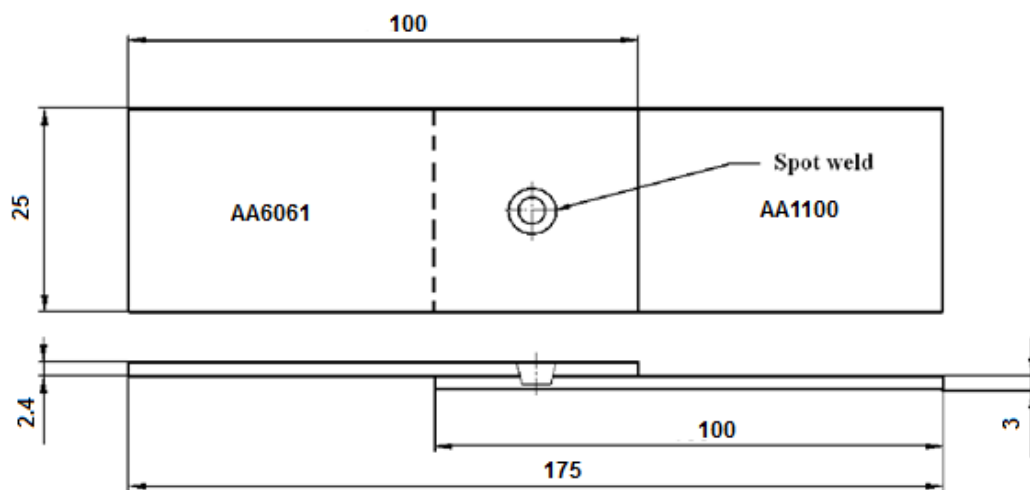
The sketch represents the spot-welded specimen dimensions.
